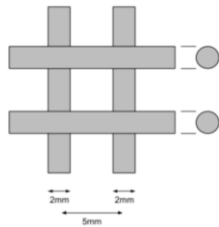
Initial dimensions of the mesh used in the bumper layers.
